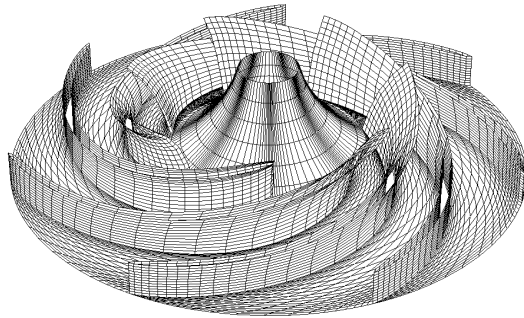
Geometry of the SHF-radial impeller (shroud surface removed), showing surface mesh.
